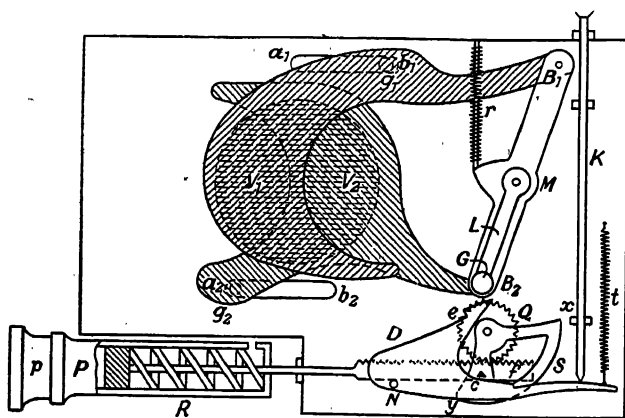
DOUBLE-PLATE SHUTTER—SET
